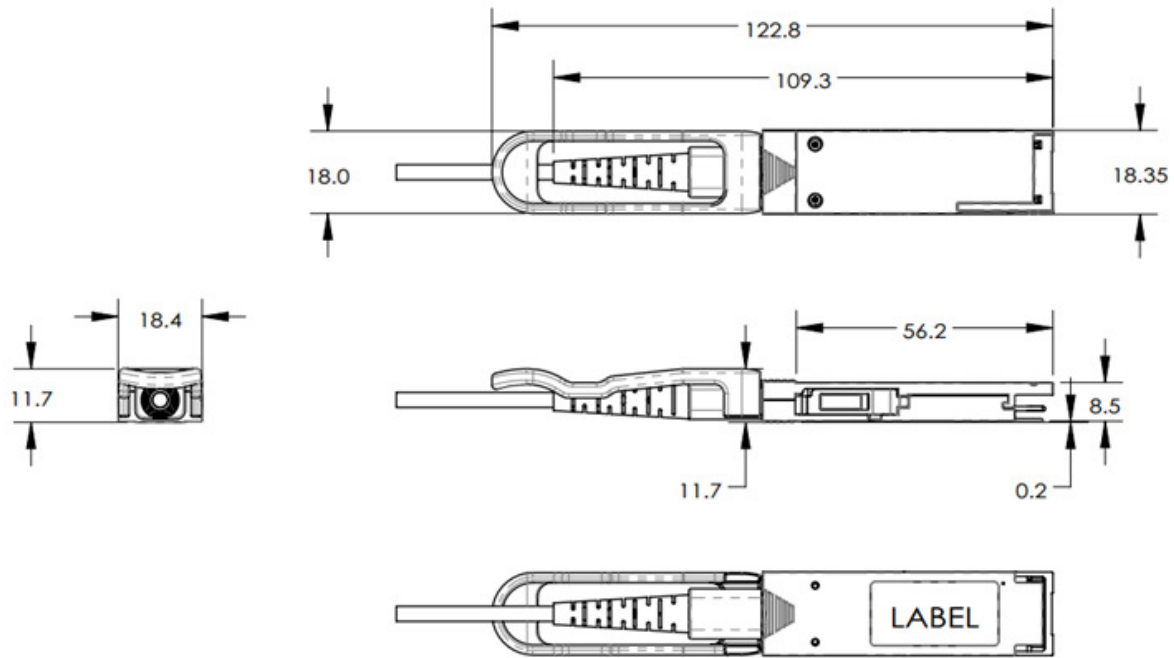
Quadwire<sup>®</sup> mechanical drawing
